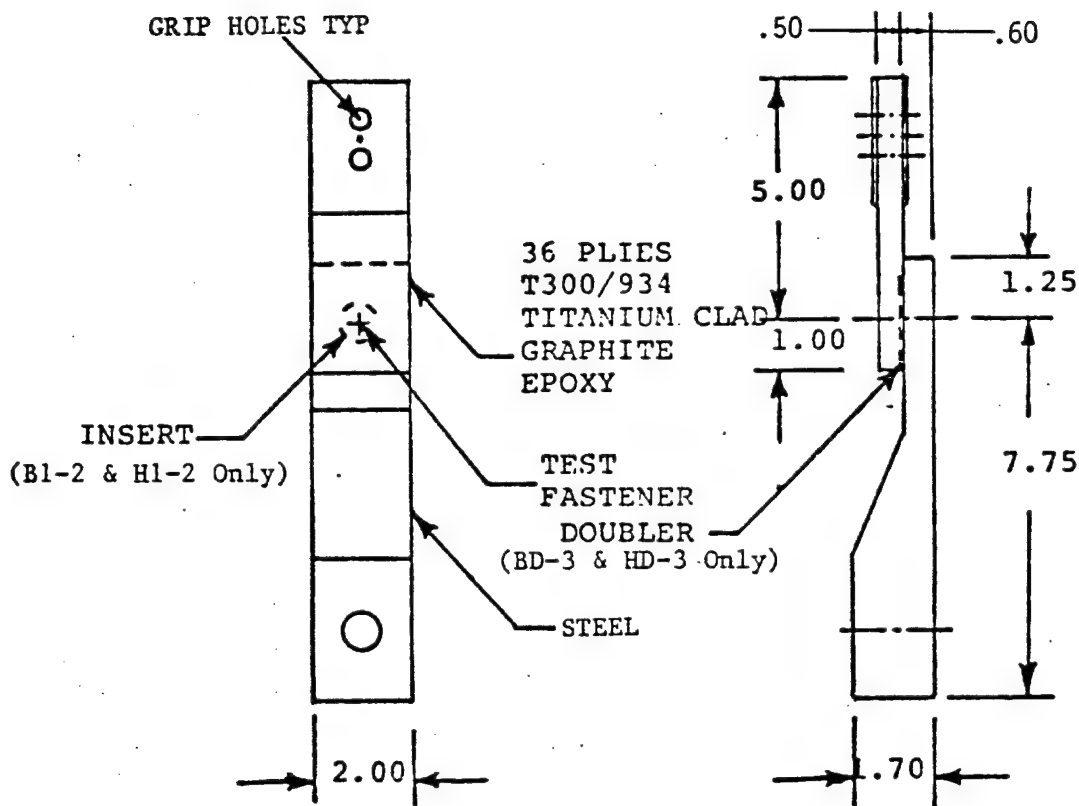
MECHANICAL FASTENER SPECIMEN FATIGUE TEST SETUP
